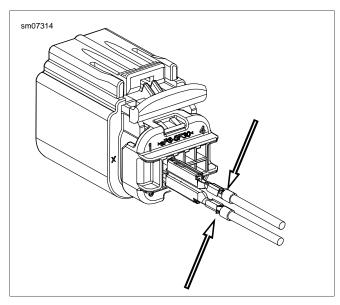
Socket Terminal Orientation: Crimp Open Side
